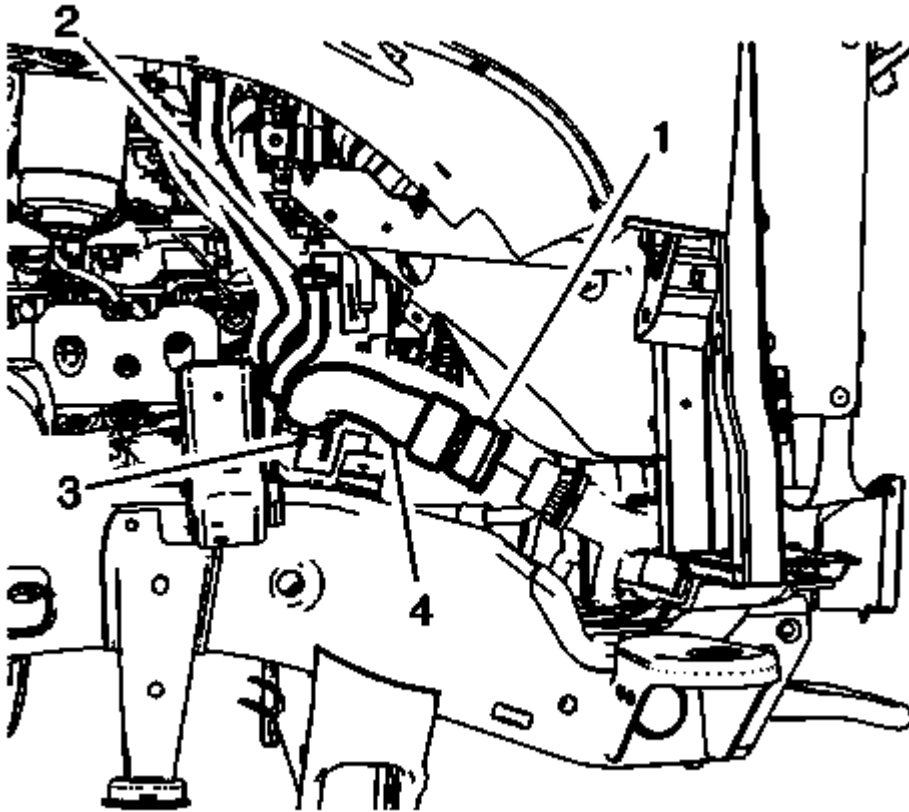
Radiator Outlet Hose, Quick Connect, Outlet Hose Clamp And Clip Retainers
